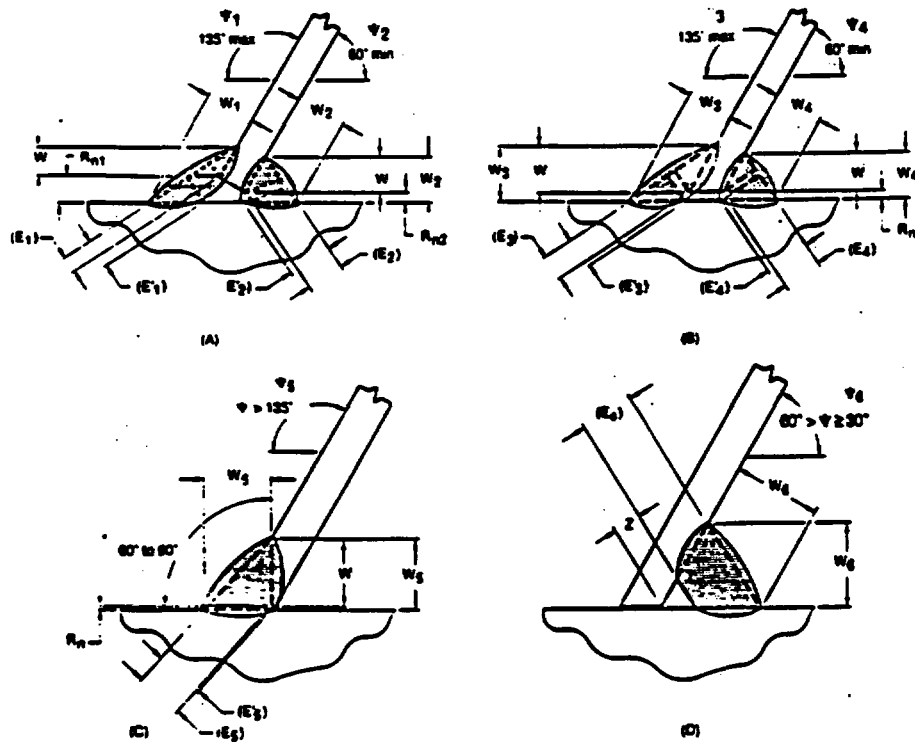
Details for Prequalified Fillet Welds
